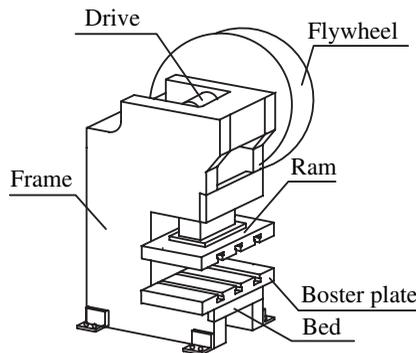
Schematic Illustration of Mechanical Drive Presses with Basic Components
